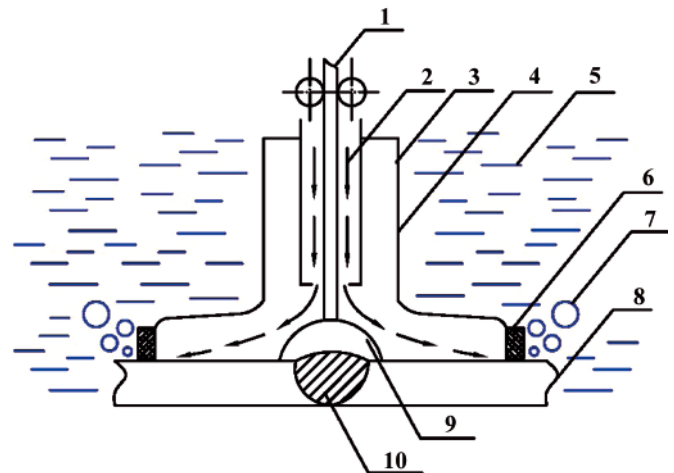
Schematic diagram of underwater welding by using the local dry chamber: 1) wire electrode, 2) shielding gas, 3) inner nozzle, 4) outer nozzle, 5) water, 6) flexible shield, 7) gas bubbles, 8) welded element, 9) electric arc, 10) weld [5]
